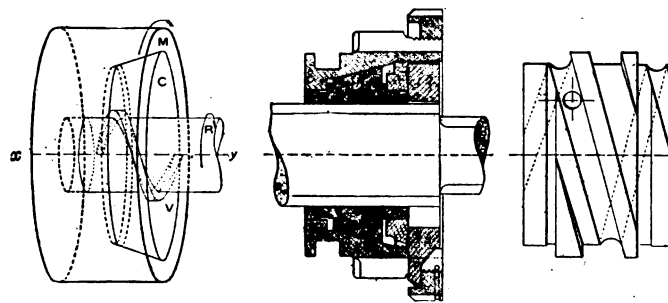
(Left)—Diagram of automatic declutcher. Fig. 2—(Center)—Automatic declutcher located inside intermediate speed sliding gear. Fig. 3—(Right)—Out-side view of threaded sleeve
